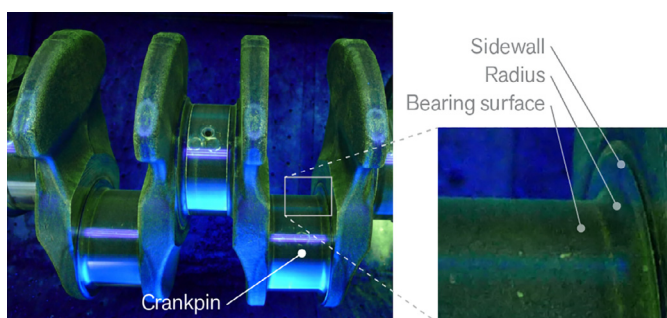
Crankshaft, with a zoomed-in view of its crankpin [57].
